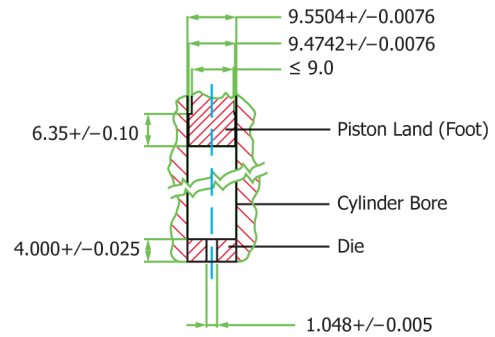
Dimensions of the cylinder bore, piston foot & "half" die
